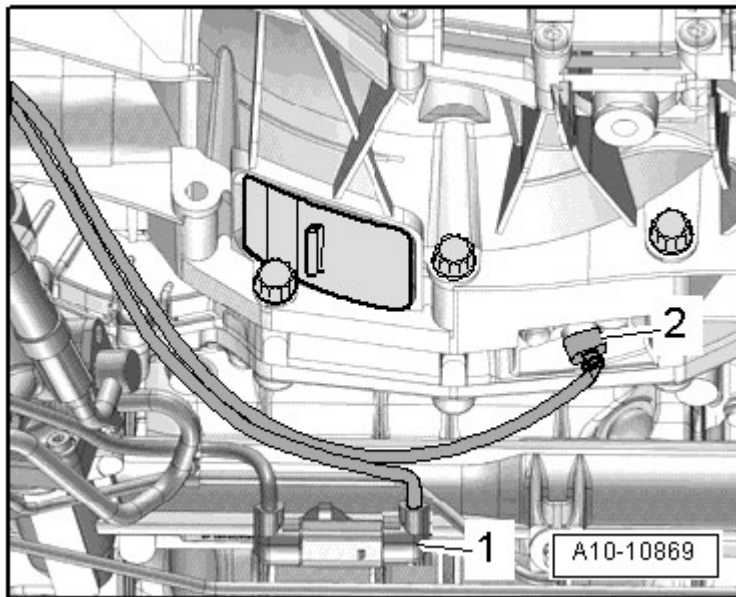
Disconnecting Connector From Servotronic Solenoid Valve
